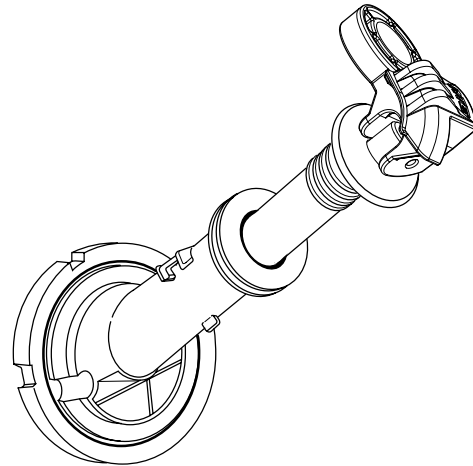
Draw fuse holder out 6 to 8 inches (152 to 203 mm).
